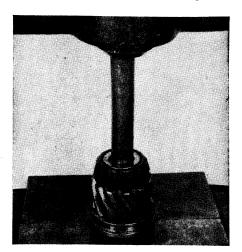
Pressing cross shaft from slow speed pinion and bearing
